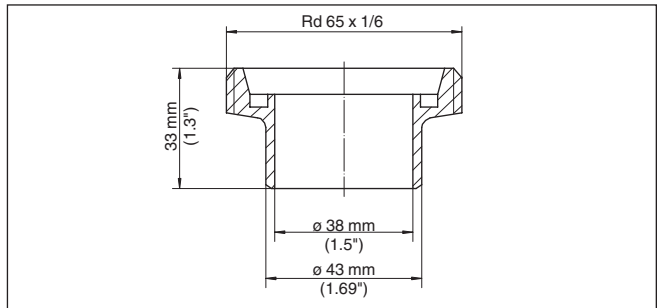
Dimensions of welded socket, slotted nut DN 40 (DIN 11851)
